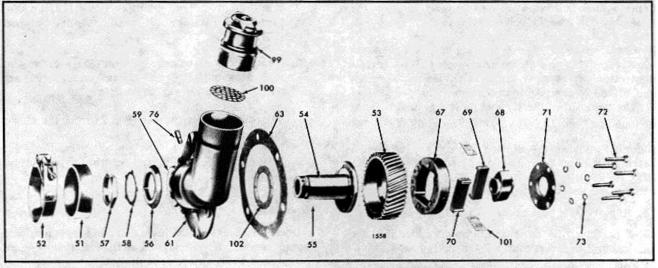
Typical Blower Drive Gear Details and Relative Location of Parts
